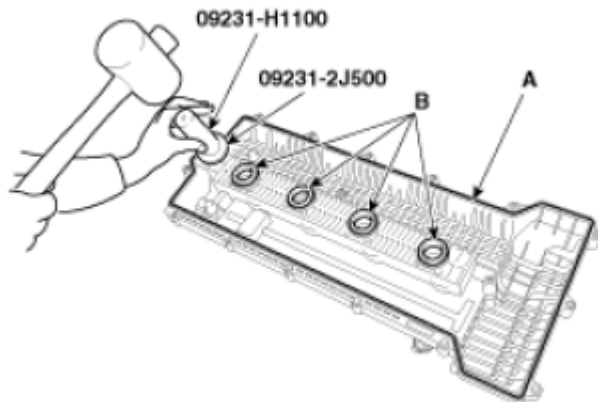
Installing Oil Seal And Gasket Using SST (09231-2J500, 09231-H1100)
